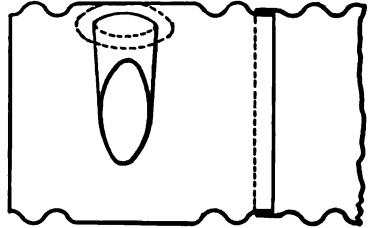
Corrugated furnace-tube with plain part for cross-tubes.
